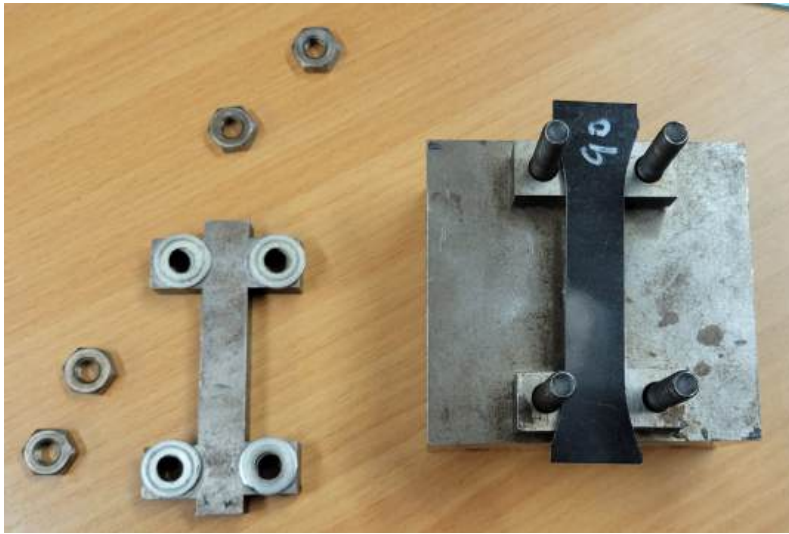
Dogbone specimen dimensions for compressive testing.
